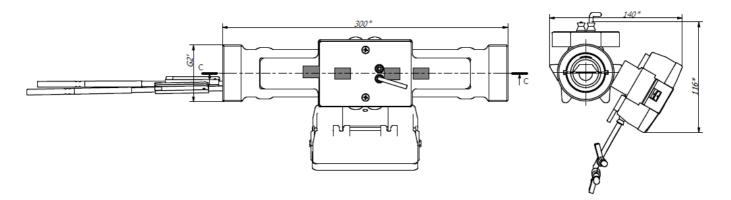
Threaded end connections G2", mounting lenght L=300 mm
